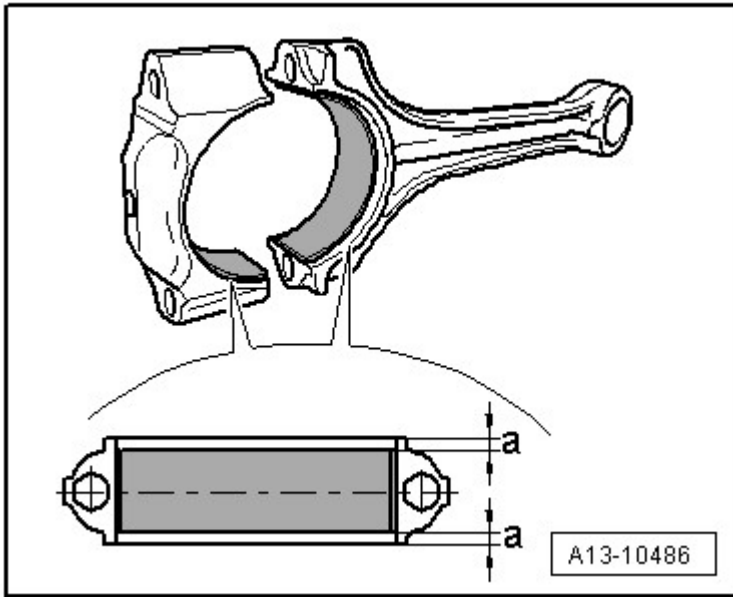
Identifying Dimension -A- (Must Be Same At Left And Right)
